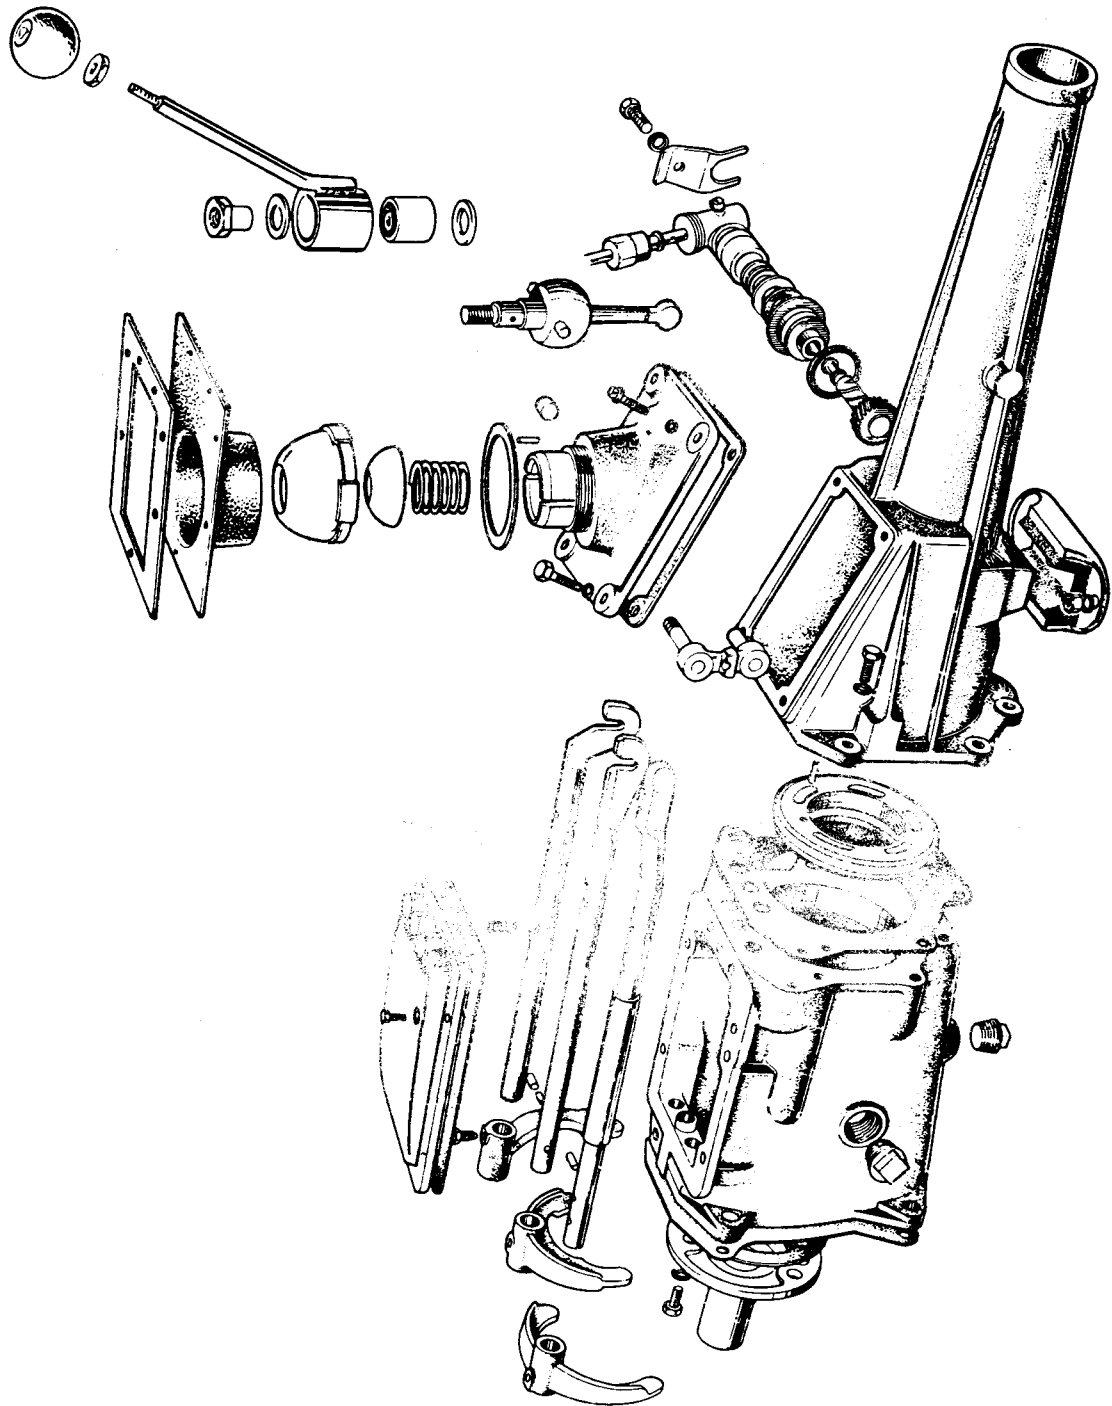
GEARBOX EXTERNAL COMPONENTS
